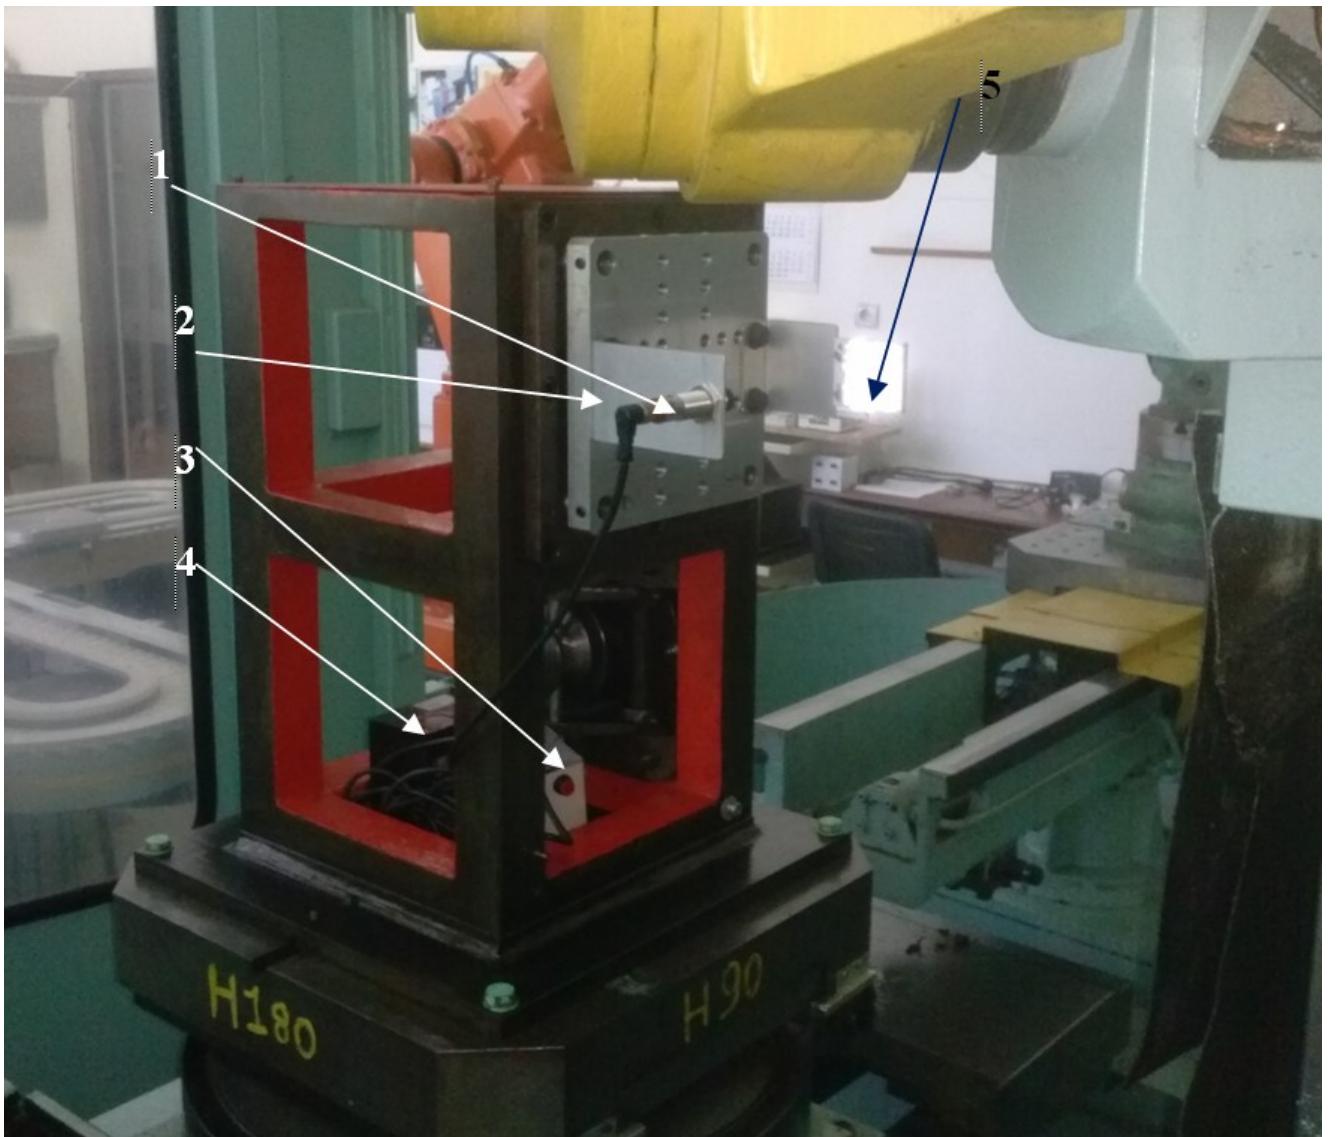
Overview of the system mounted on the 5 axis CNC machine.
